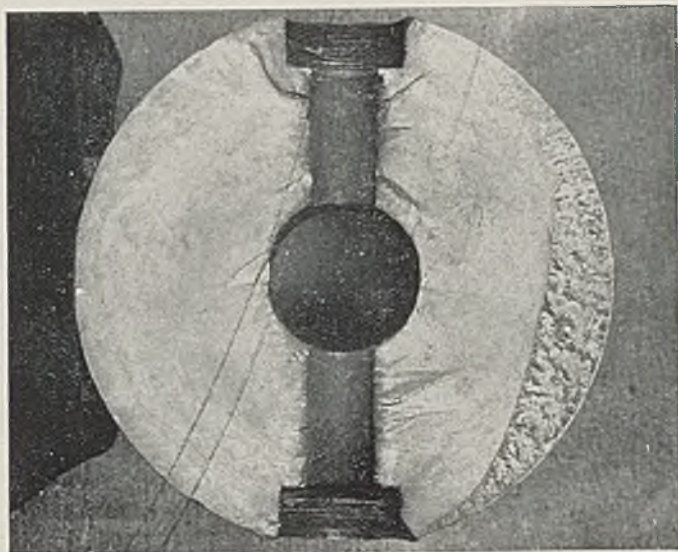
Corrosion-Fatigue Failure of a Water-Cooled Piston Rod of a Gas Engine. Service 12 years.
